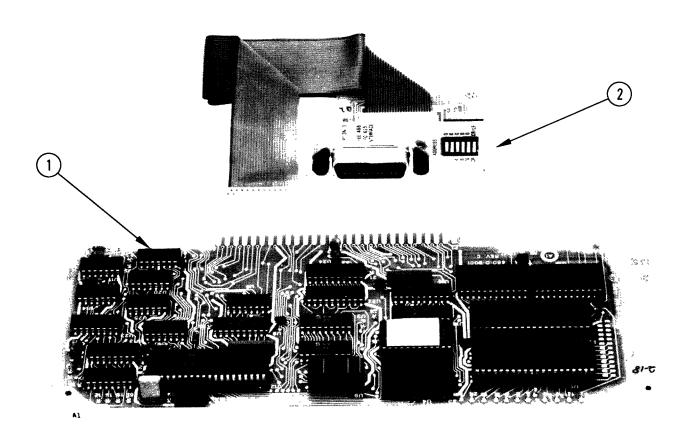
A16 Rear Panel Assembly, Dwg. 660-D-8016 (See Figure 6-4 for next higher assembly) (Sheet 2 of 2)
